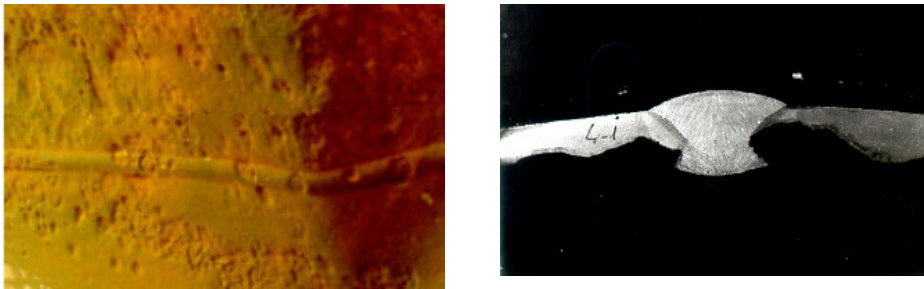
Longitudinal pipe welded joint of condensation holder body
